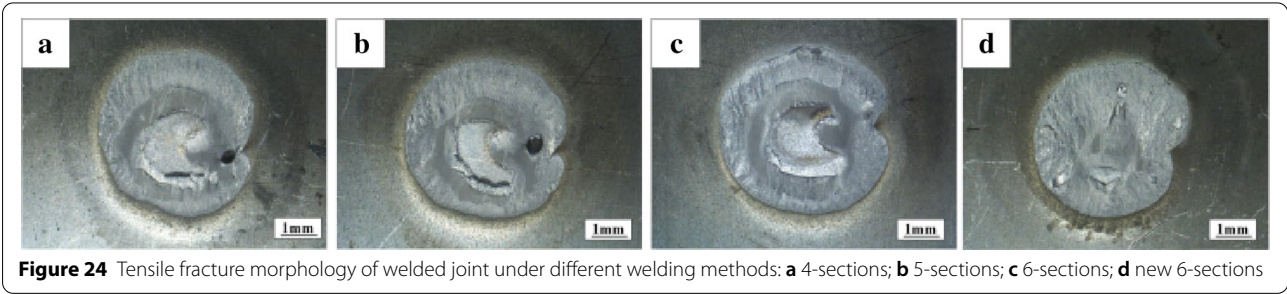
Tensile fracture morphology of welded joint under different welding methods: a 4-sections; b 5-sections; c 6-sections; d new 6-sections
